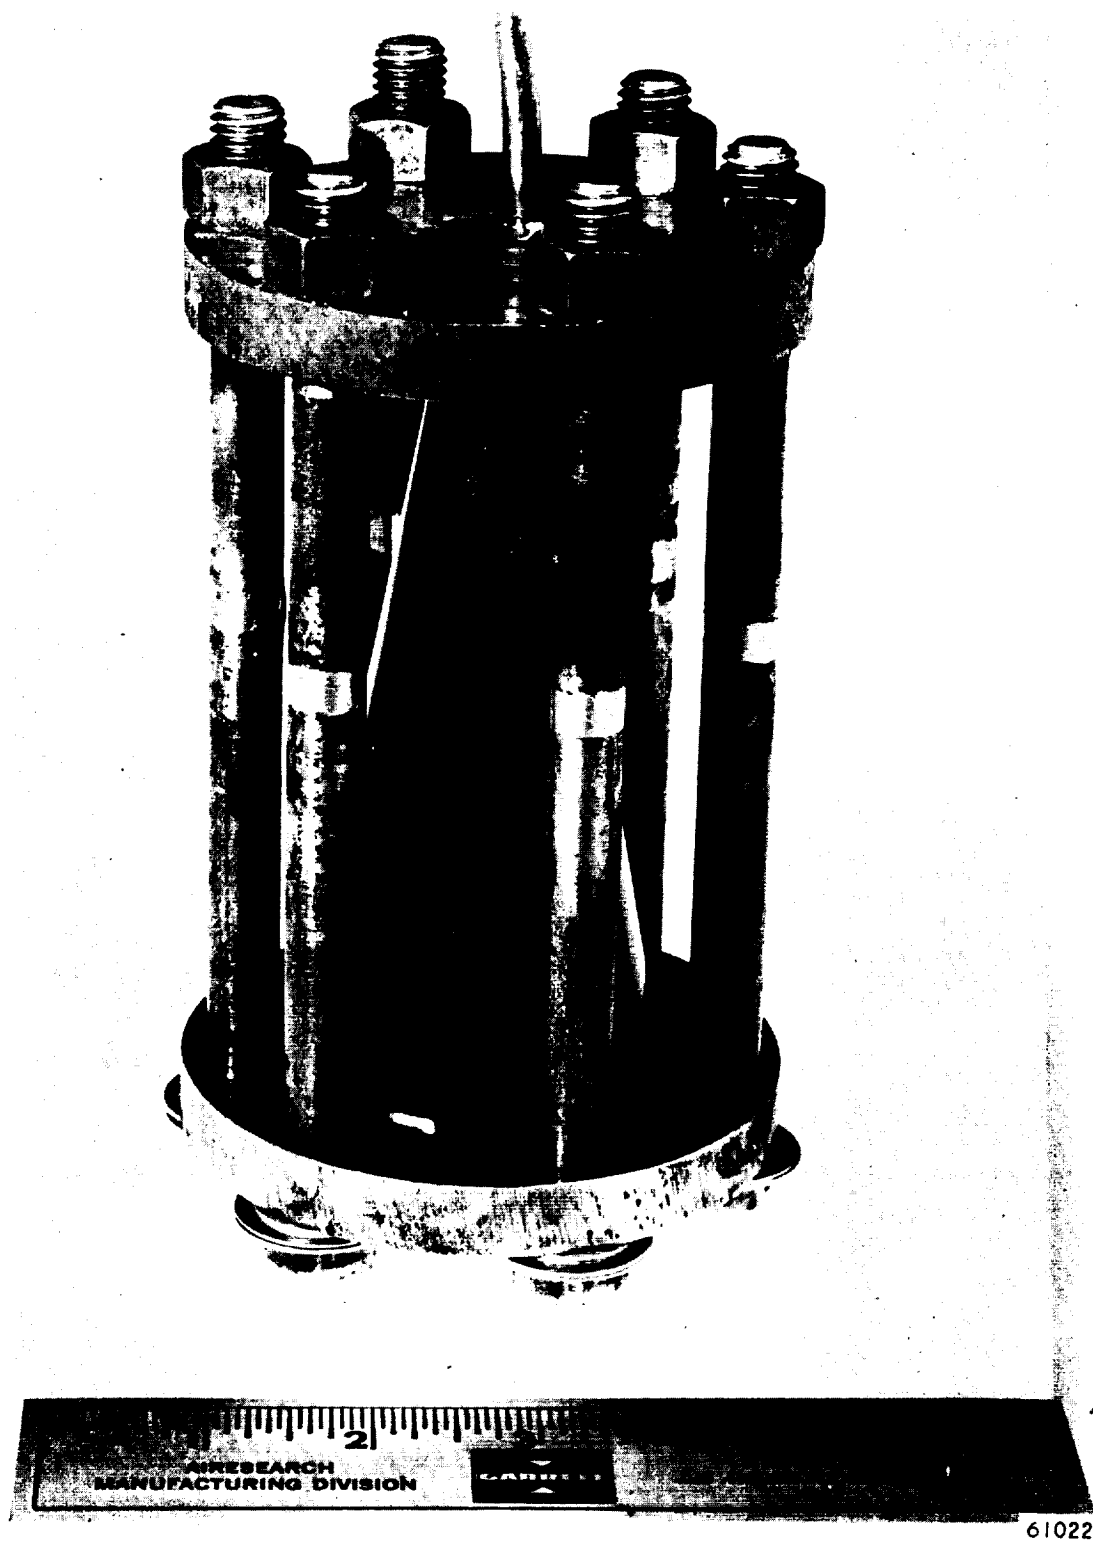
Spike Tip Test Section Burst Test Fixture
